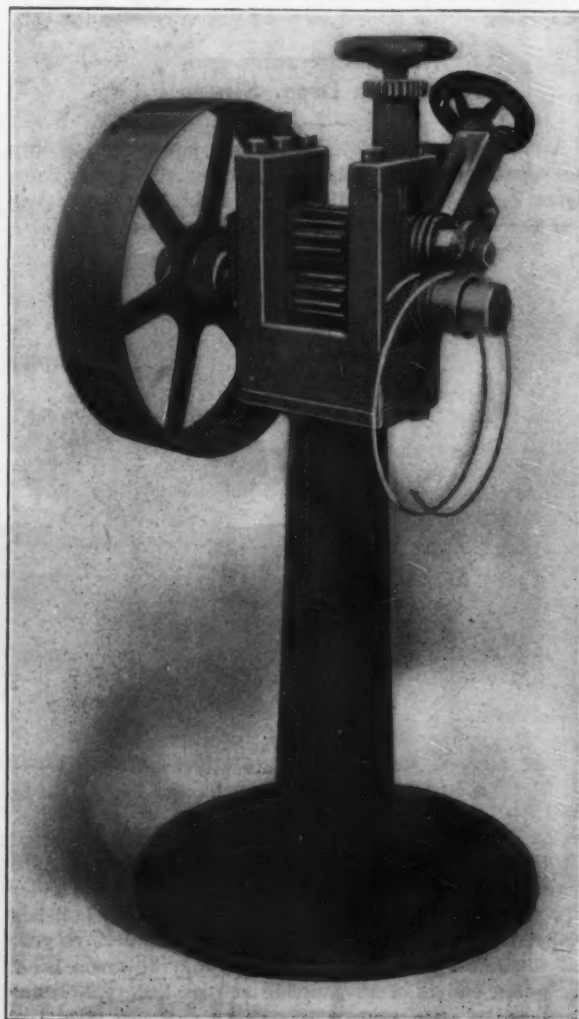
A Helix Coiling Machine Built by the F. B. Shuster Company, New Haven, Conn.
